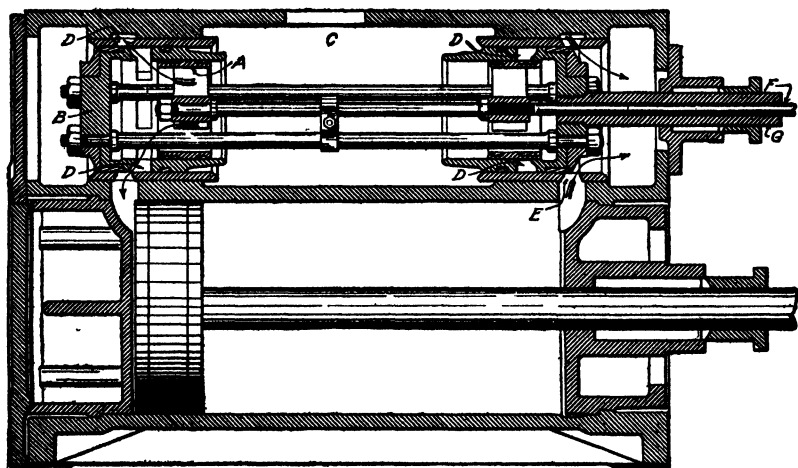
Section of Cylinder and Valve-Gear Mechanism of Thompson Automatic Valve Gear
